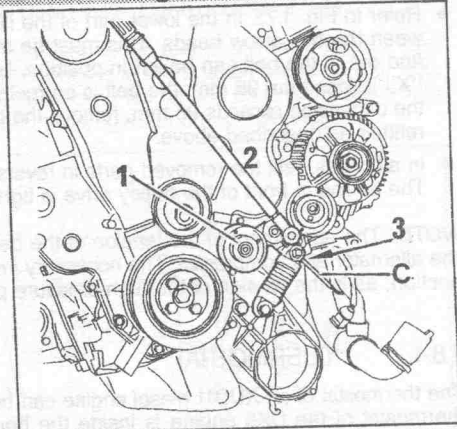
Resetting the automatic tensioner (1) into the locked position, if the belt is broken or the travel of the tensioner roller is not sufficient. Use a  $\frac{3}{8}$  in. socket drive with ratchet and extension is inserted as shown and operate the tensioner until the tool (C), i.e. the 4 mm rod, can be inserted into hole (3).
